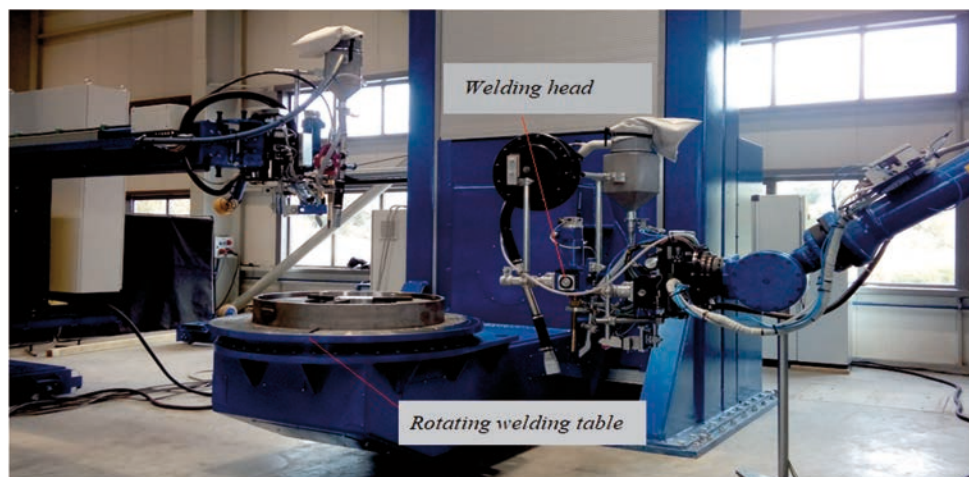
FANUC-Robot M900iA submerged arc welding station
